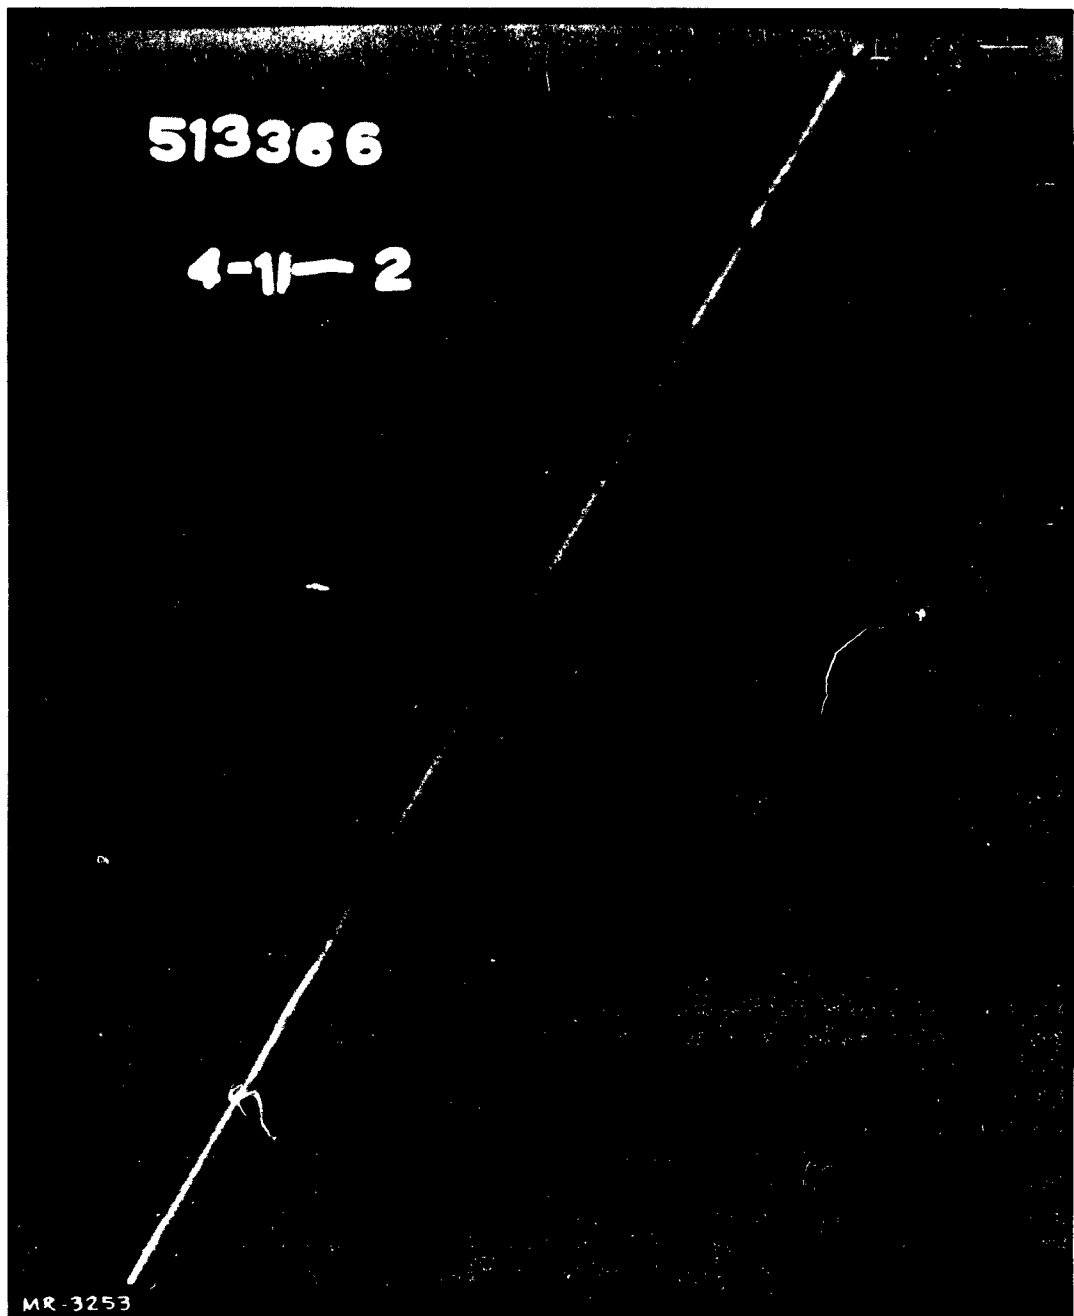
X-ray of Weldment in Ring before Test (V-202)
